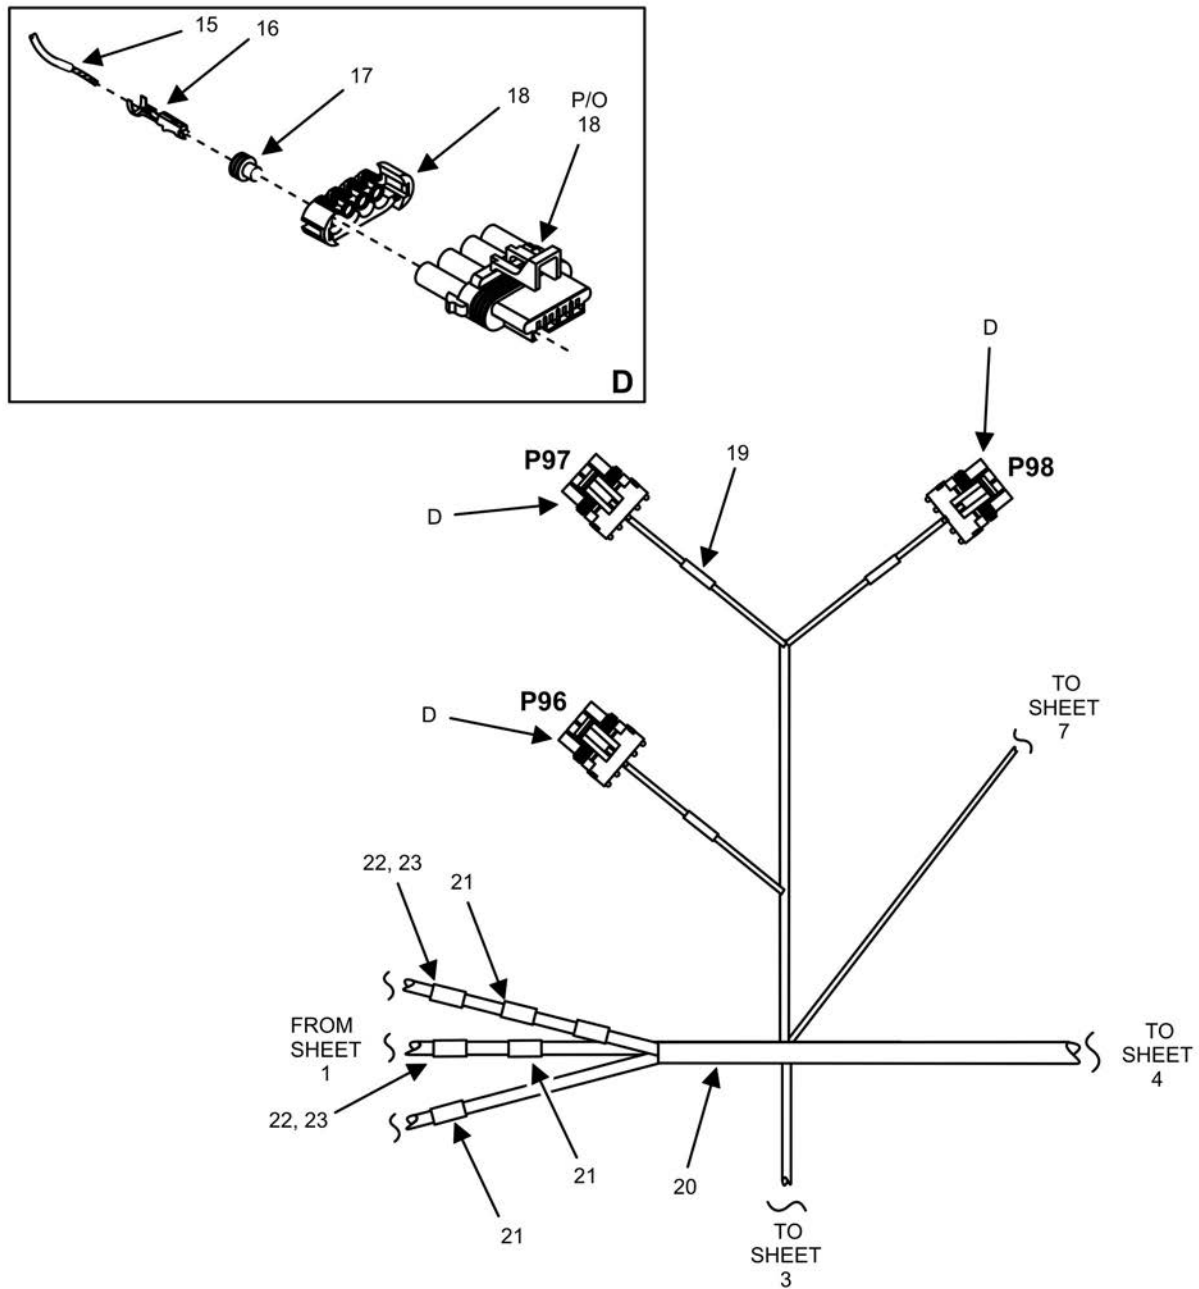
Engine Wiring Harness (Sheet 2 of 19).
